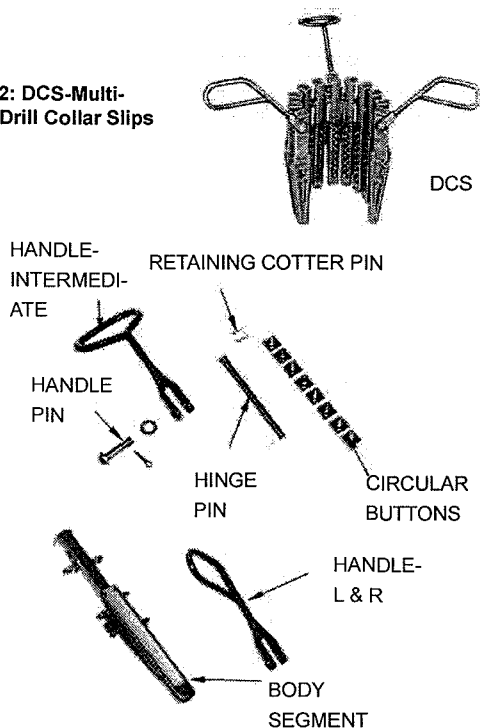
DCS-Multi-Segment Drill Collar Slips Parts
